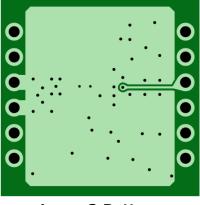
shows the PCB pattern diagram of the module board, and Fig. 3.2 shows the pattern diagram of the base board.
